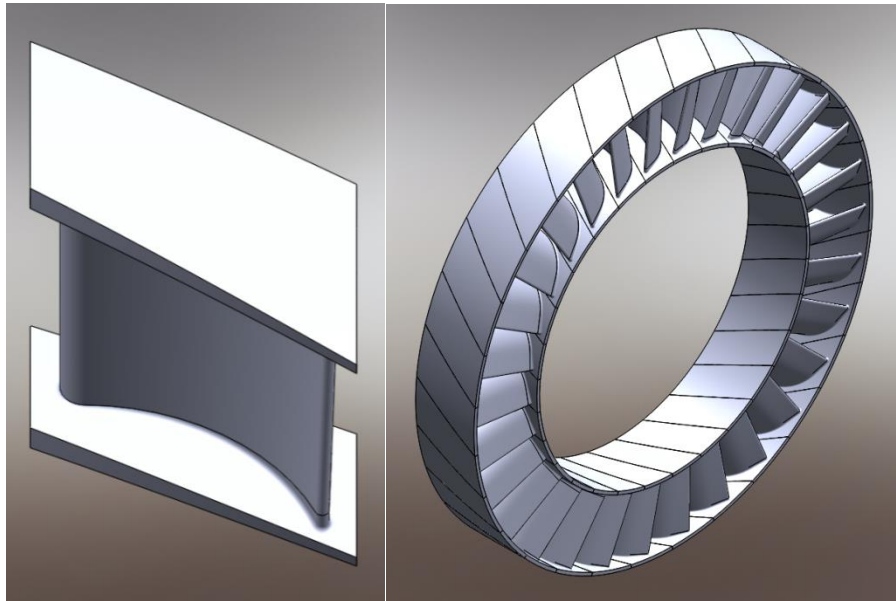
Turbo-expander stator individual segment and ring assembly
